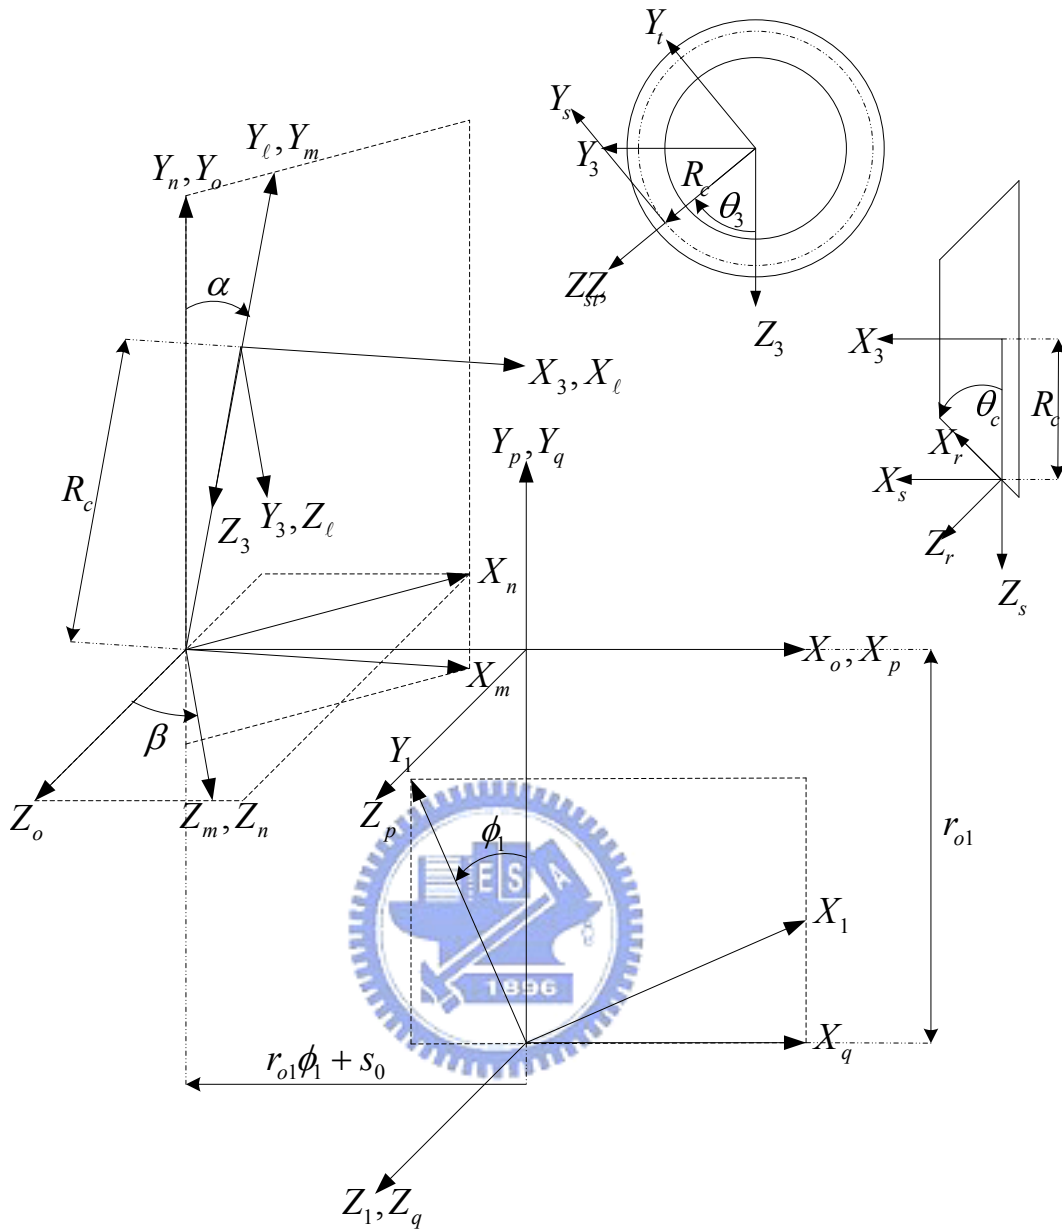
Coordinate systems of shaving cutter re-sharpening machine.
